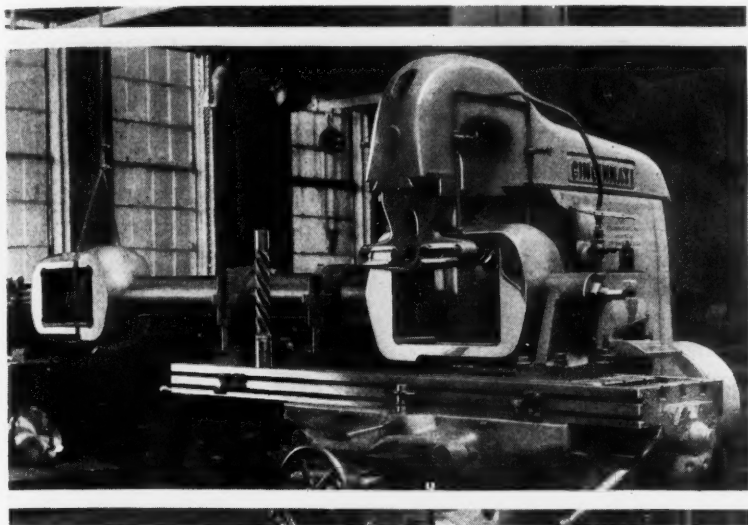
(Left) A Cincinnati No. 5 Plain Milling Machine Reducing the Time of Milling Large Forged Connecting-rod from 25 to 9 Hours. The 3- by 18-inch Cutter Operates at a Cutting Speed of 53 Feet per Minute, Removing 3/16 Inch of Stock
